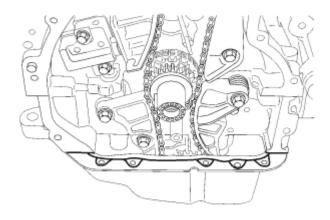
LOWER T-JOINTS Courtesy of CHRYSLER LLC
